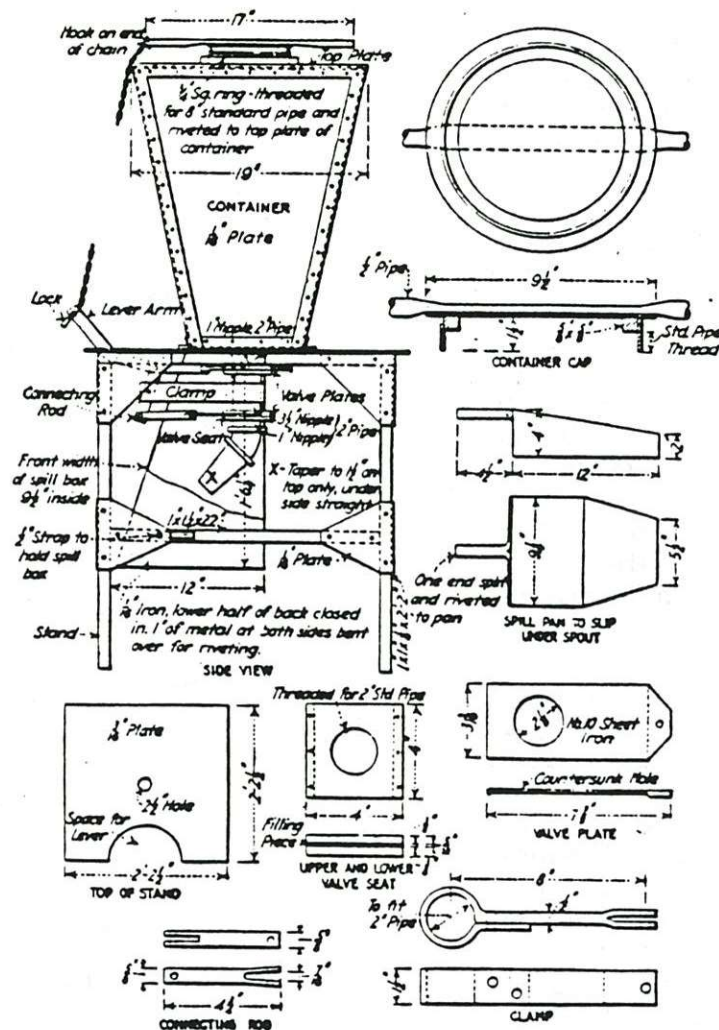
ASSEMBLED CARBIDE CONTAINER AND DETAILS OF CERTAIN PARTS.
